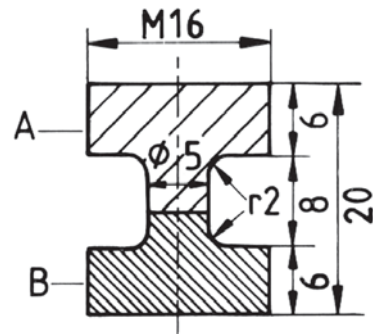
Geometry of the welded sample for the microtensile experiment
